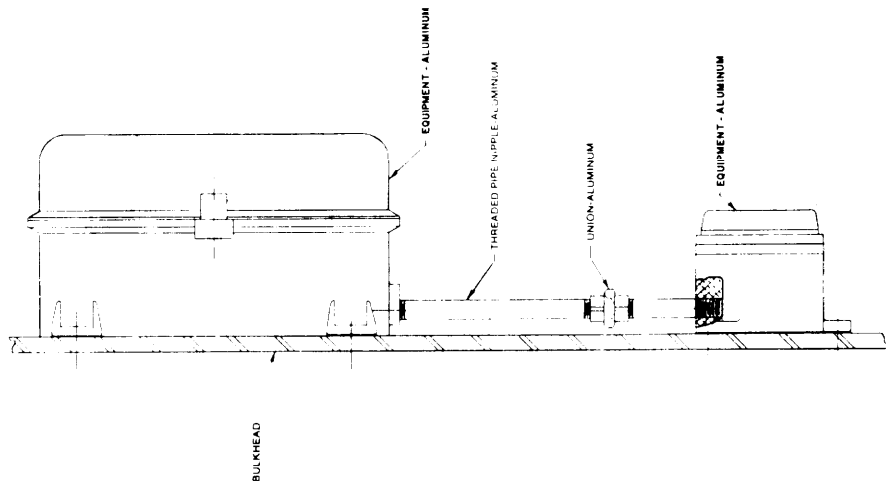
A17. Connecting adjacent cast aluminum equipment with pipe nipples.
